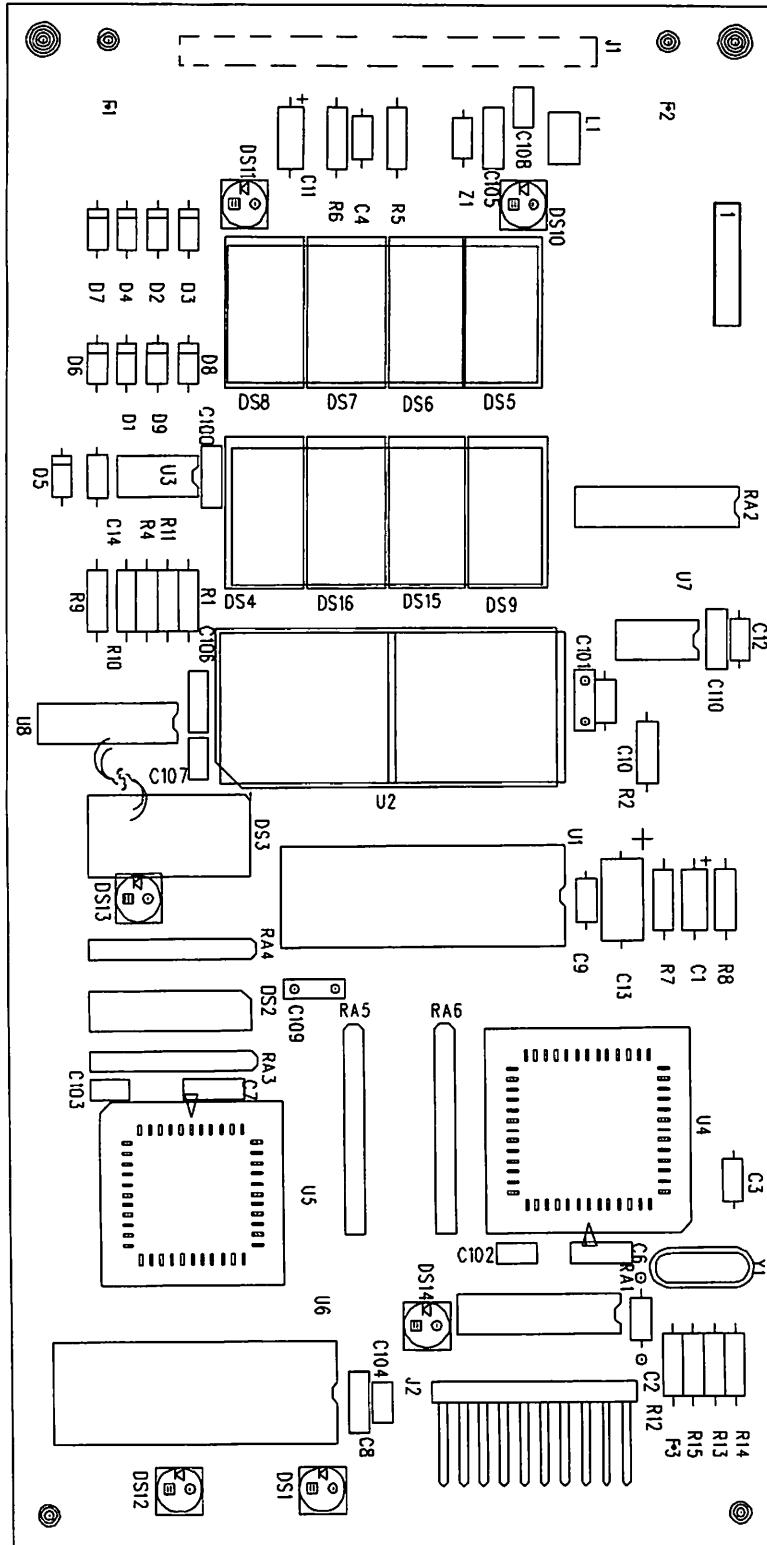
Parts Identification Display Circuit Assembly [v8.13]
